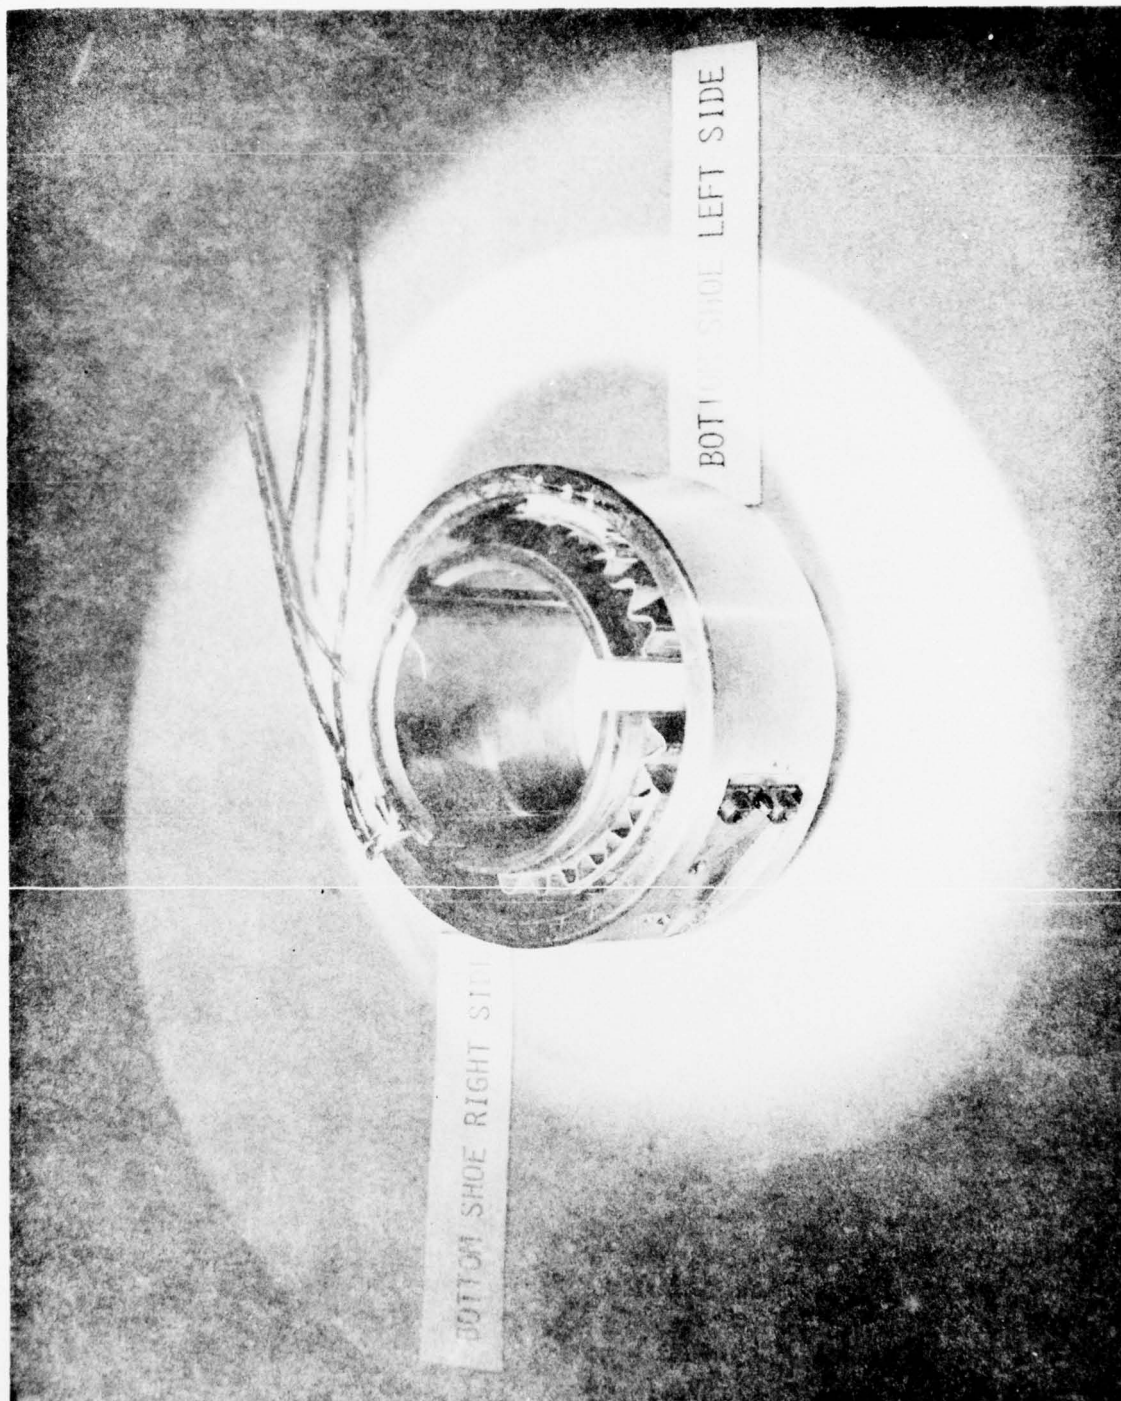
Condition of Outboard Bearing After Overload Contact
